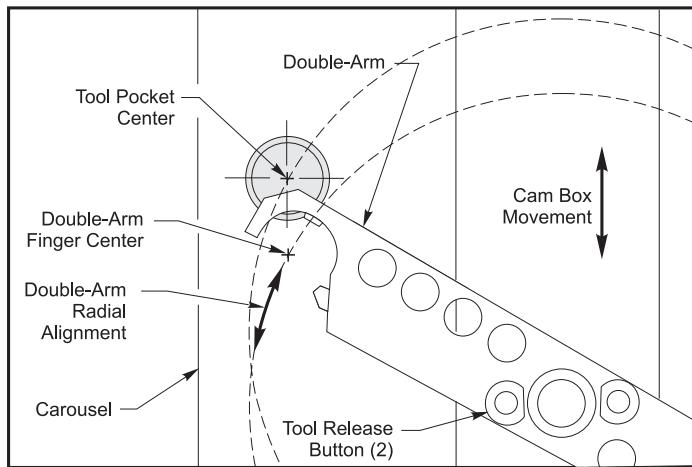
Cam Box / Double Arm Alignment, top view.
